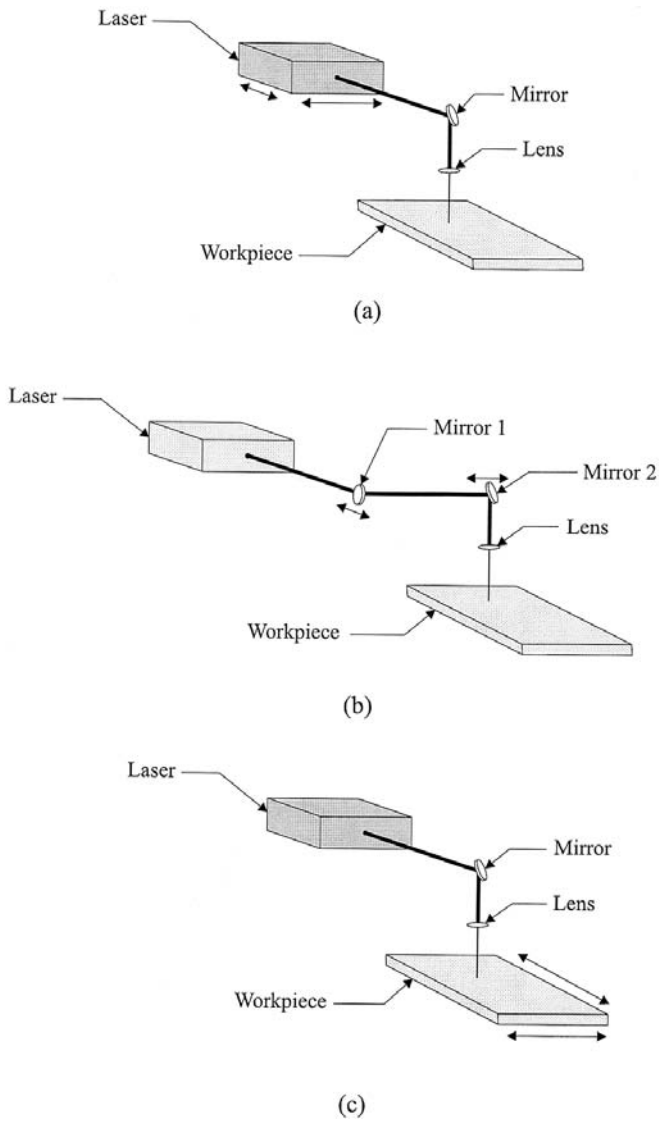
Continuous laser cutting: (a) moving laser; (b) moving optics; (c) moving workpiece.
